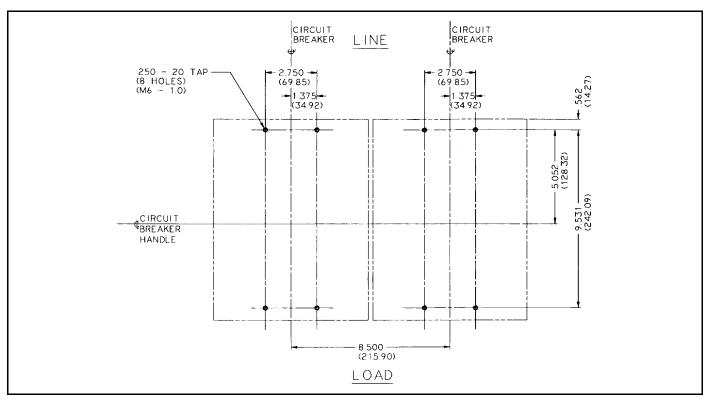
L-Frame 2- and 3-Pole Circuit Breaker Mounting Bolt Drilling Plan
